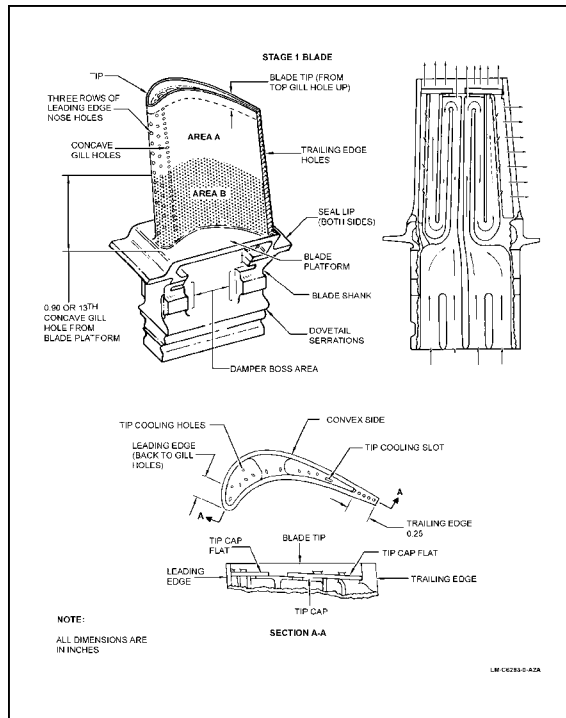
High Pressure Turbine Rotor Stage 1 Blade (Single Shank)
